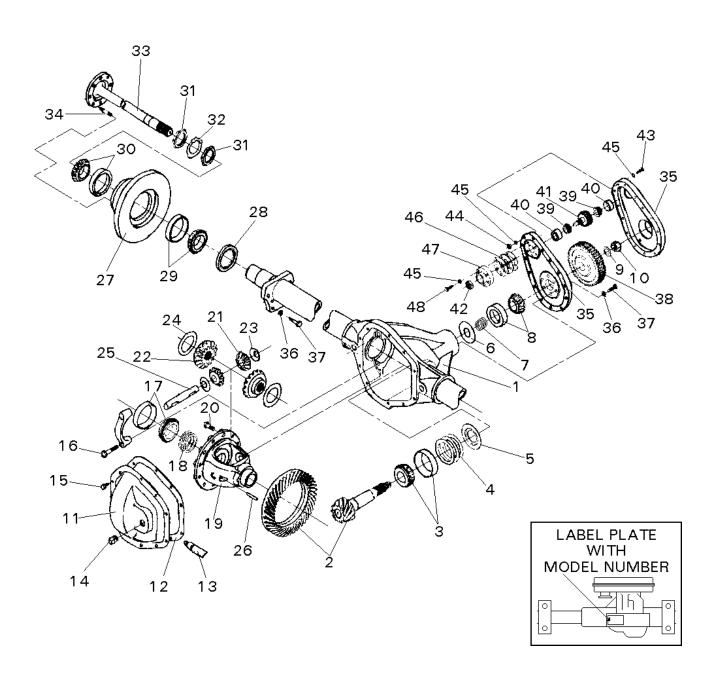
Dana Drive Axle and Reduction Gear Assembly
